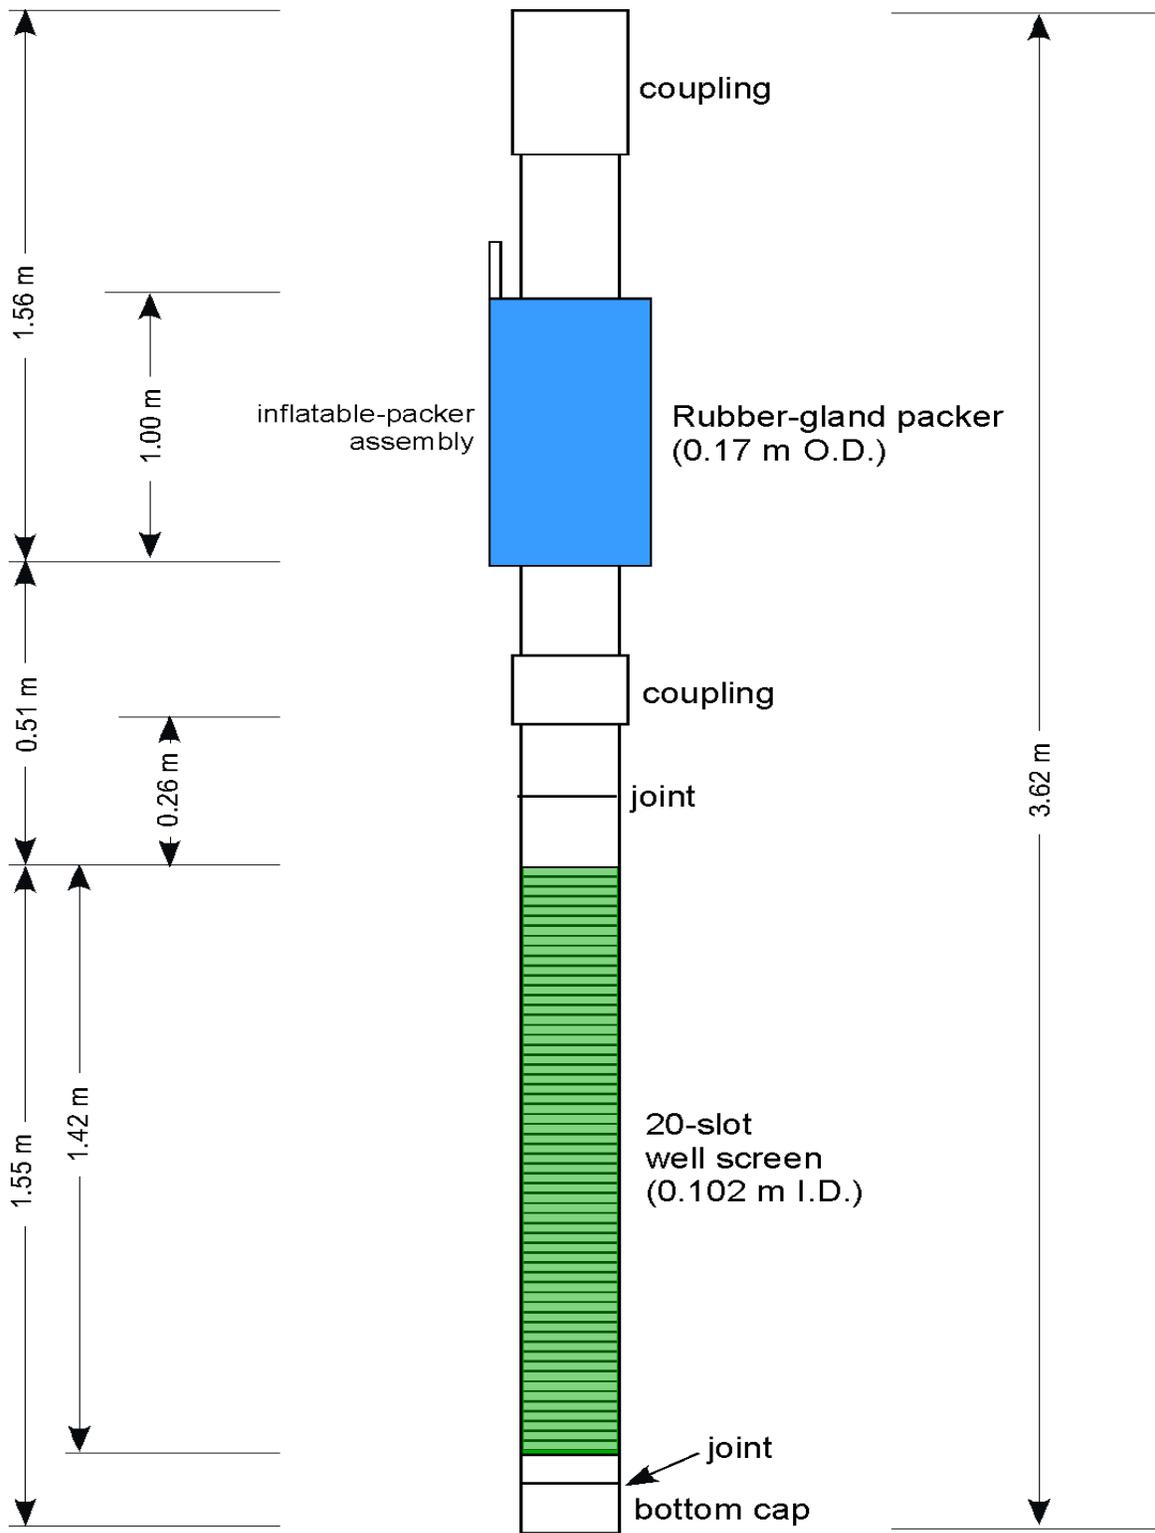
Packer/Well-Screen Assembly Dimensions: Larger Test System
